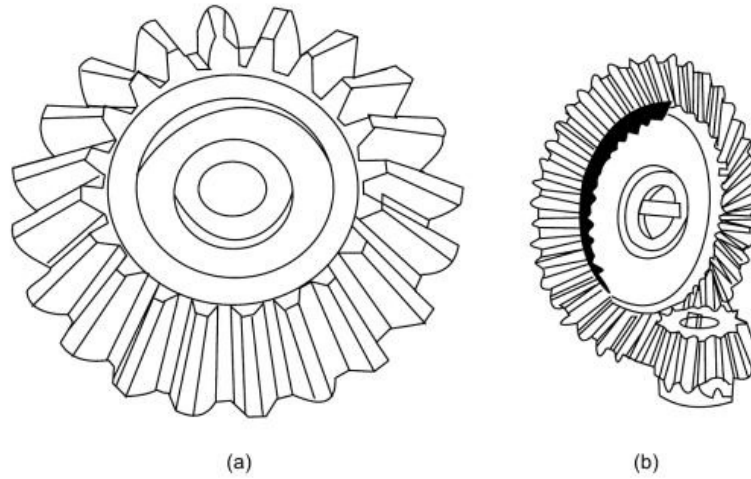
(a) Bevel gear (b) Bevel gear pair
